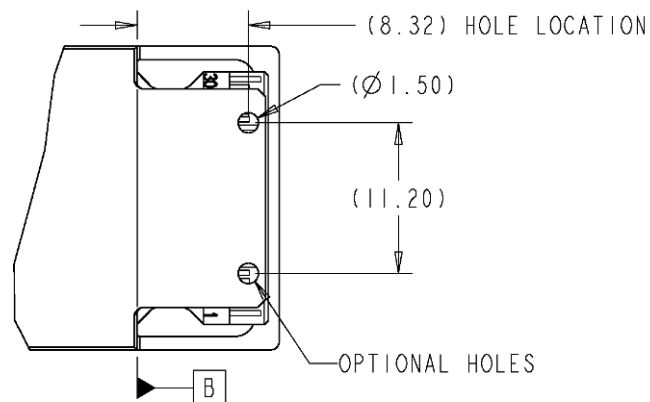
OSFP, back, bottom view, optional signal pad inspection holes
